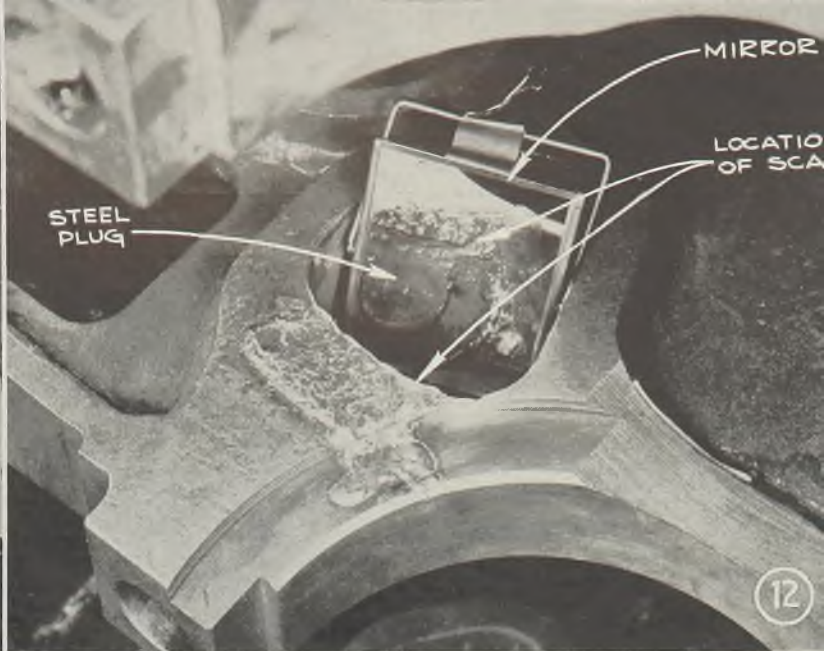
Defect shown in Fig. 11 after precision welding
